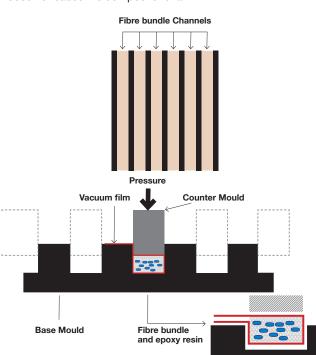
Schematic of the mould used to produce the IFBT samples. [2]
